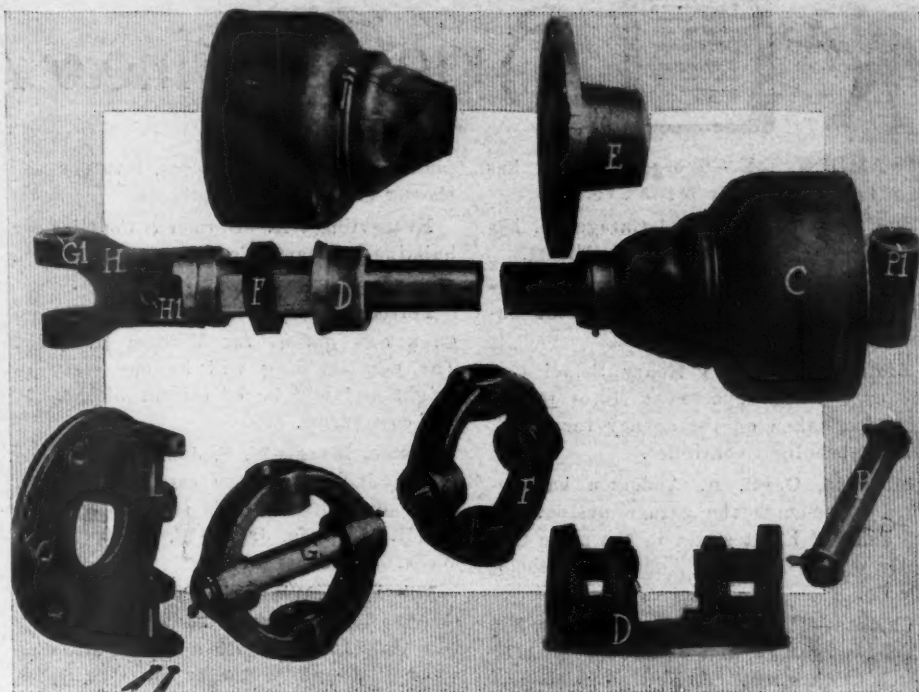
DRIVE SHAFT WITH TWO HARTFORD JOINTS
